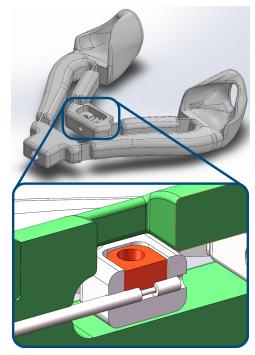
Compliant handle design (top), with a cut section of the the locking mechanism for the push pull rod (bottom).
